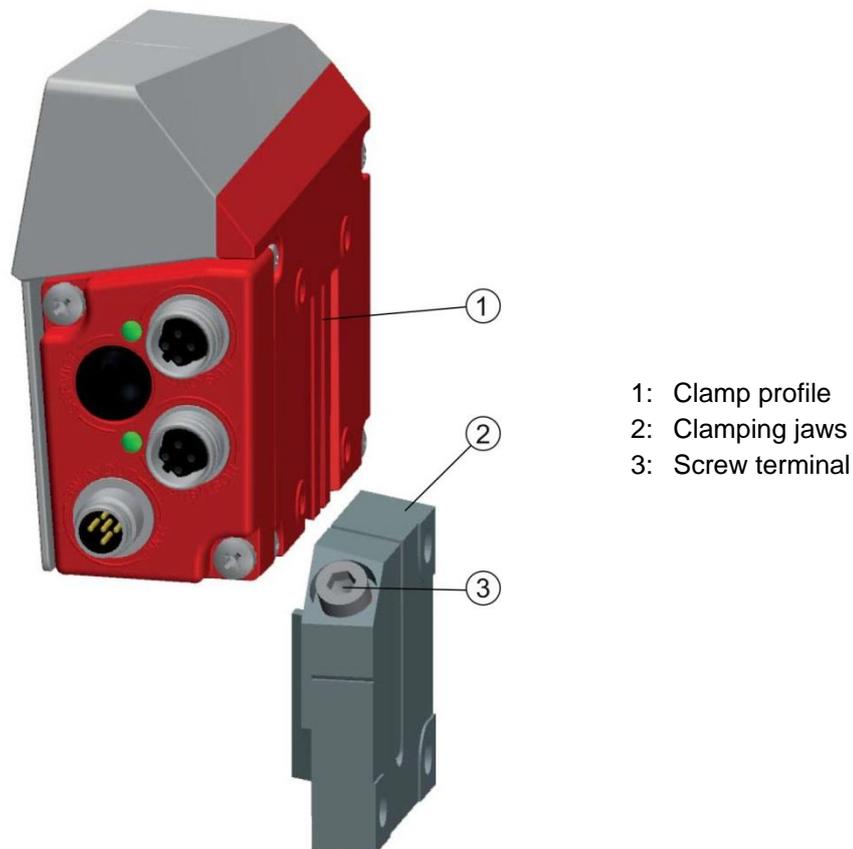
Mounting the BE 901 SSI with the BE 901 FA-001 mounting device
